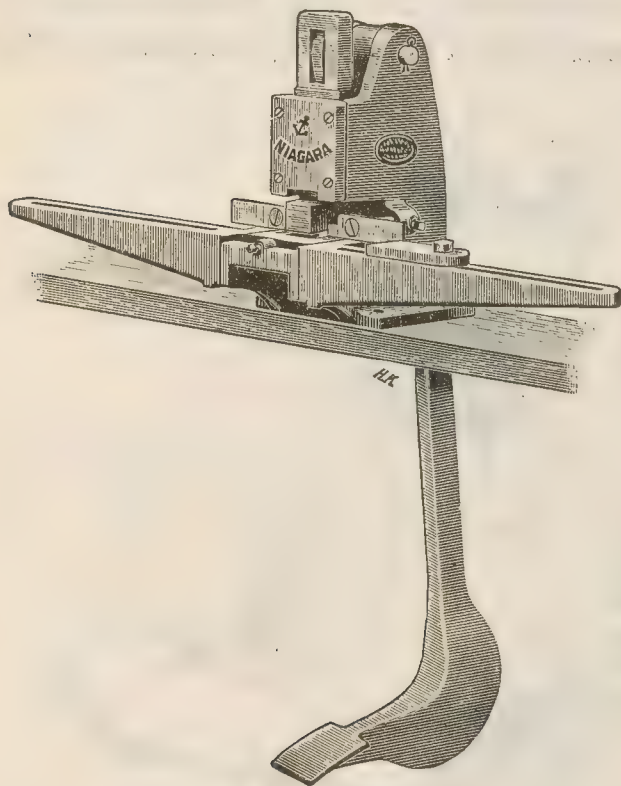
,812.—Niagara notching machine for notching sheet metal for wiring and grooving, for cutting corner and hinge notches, etc. The rectangular die is suitable for notches up to $1\frac{1}{2}$ ins. wide and 2 ins. deep. Adjustable side and back gauges are provided, and several thicknesses of light tin can be cut at the same time.
